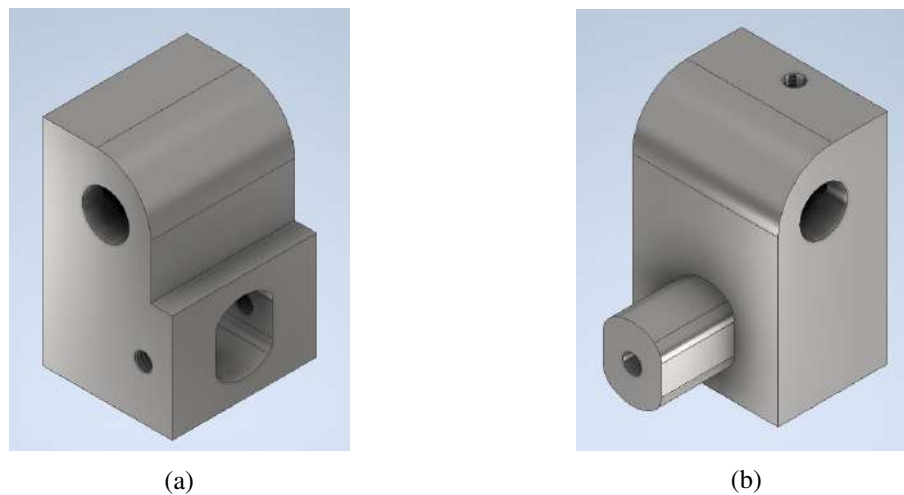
Final design for the heaters: (a) heater female connection (M) and (b) heater male connection (F).
